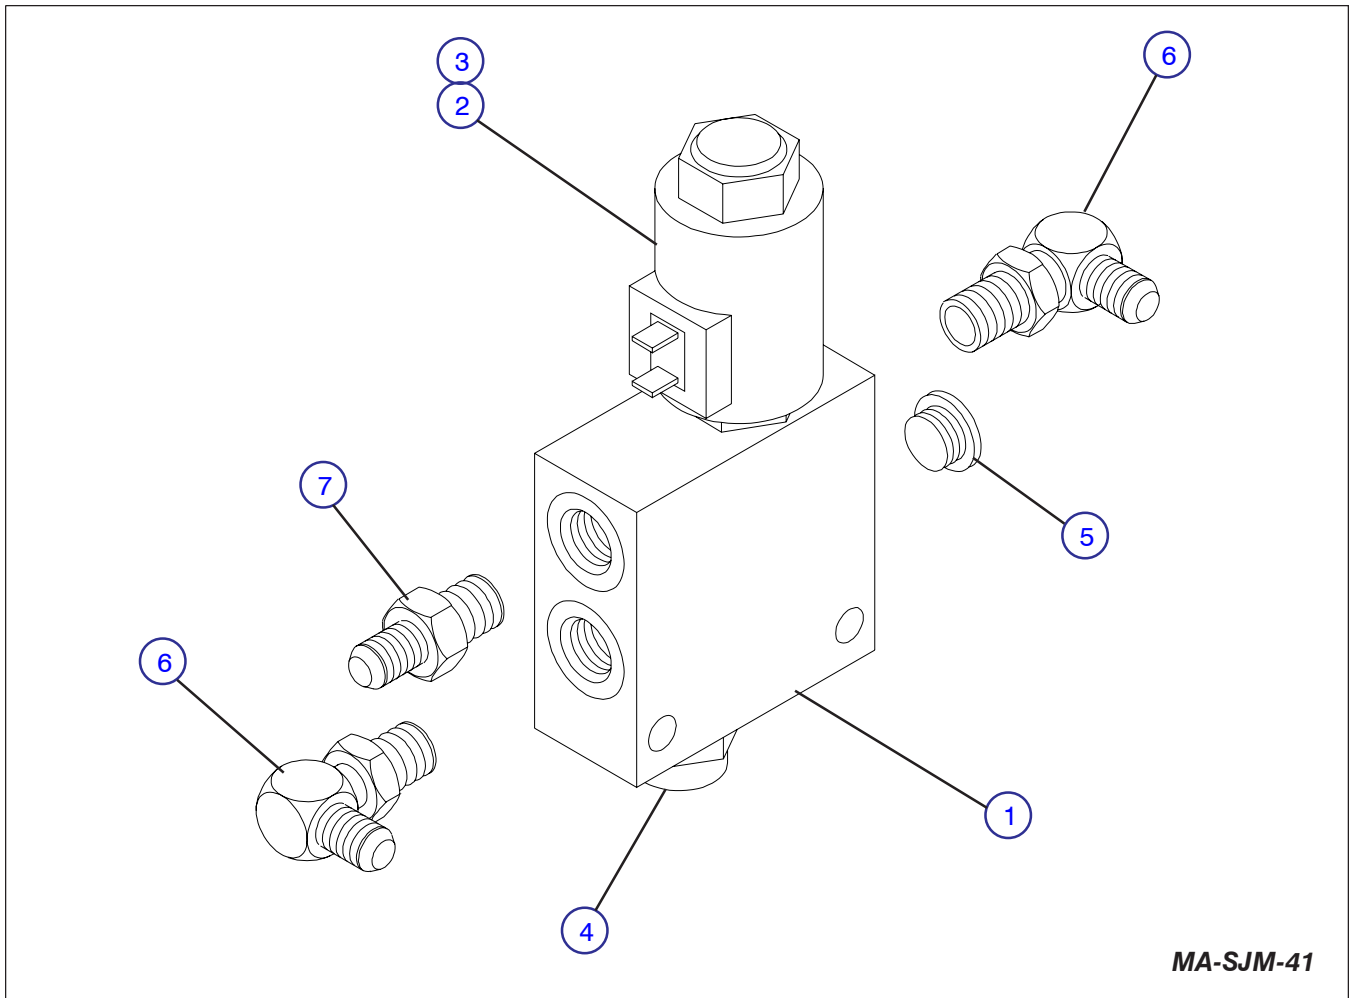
FRONT AXLE MANIFOLD ASSEMBLY
